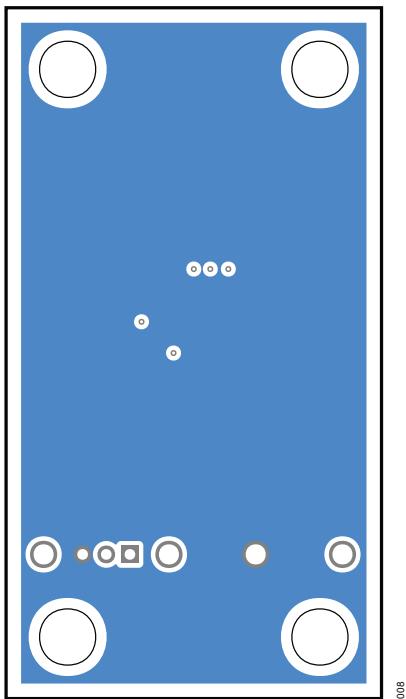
EVAL-ADPL21610-AZ PCB Layout—Bottom View
